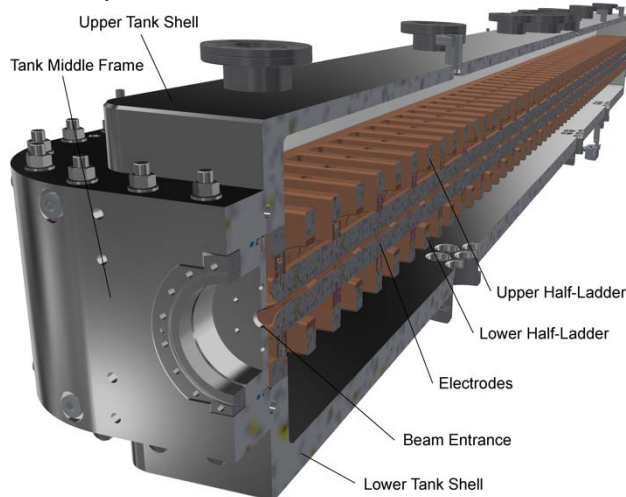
Isometric view of the 3.3 m modulated Ladder-RFQ prototype. Copper carrier-rings guarantee the electrode positioning as well as the RF contact. The ladder structure consists of bulk copper components. Any brazing or welding processes were avoided for the assembly of the main components.
